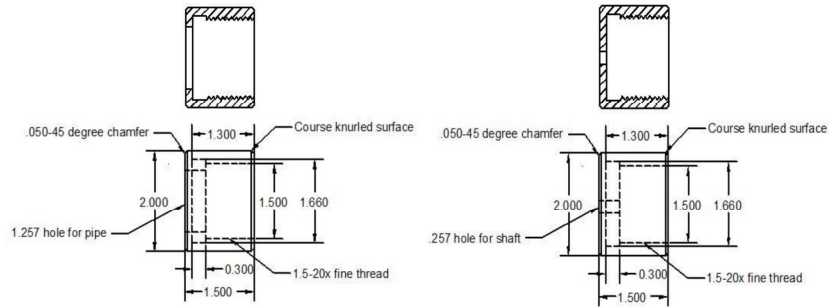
Working Drawings for Custom Knurled Threaded Caps
